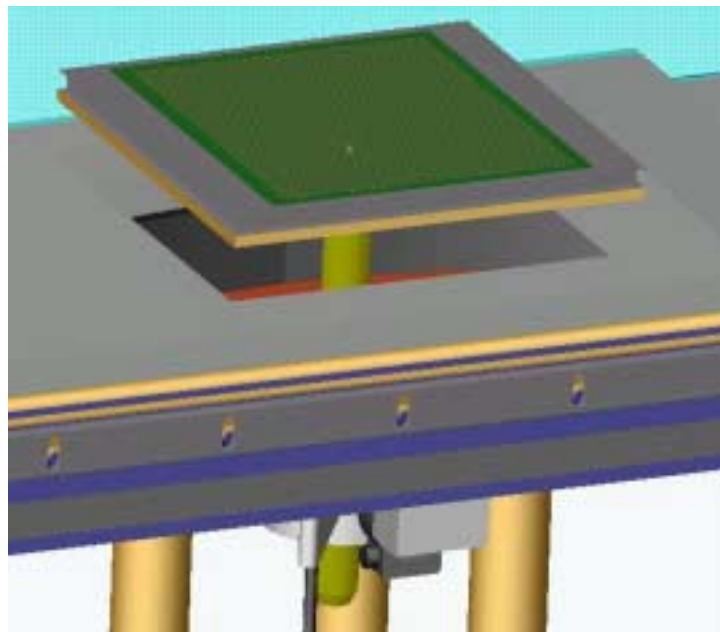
3D model assembly showing cassette mounting in dynamometer
